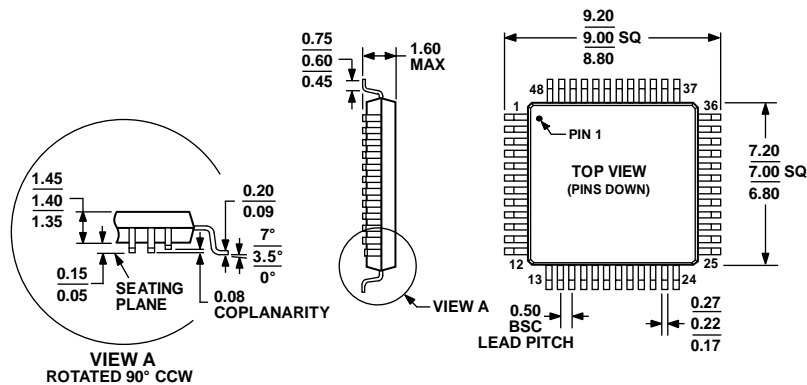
48-Lead Low Profile Quad Flat Package [LQFP]
